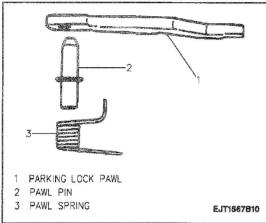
Parking Pawl, Pivot Pin and Parking Pawl Torsion Spring
